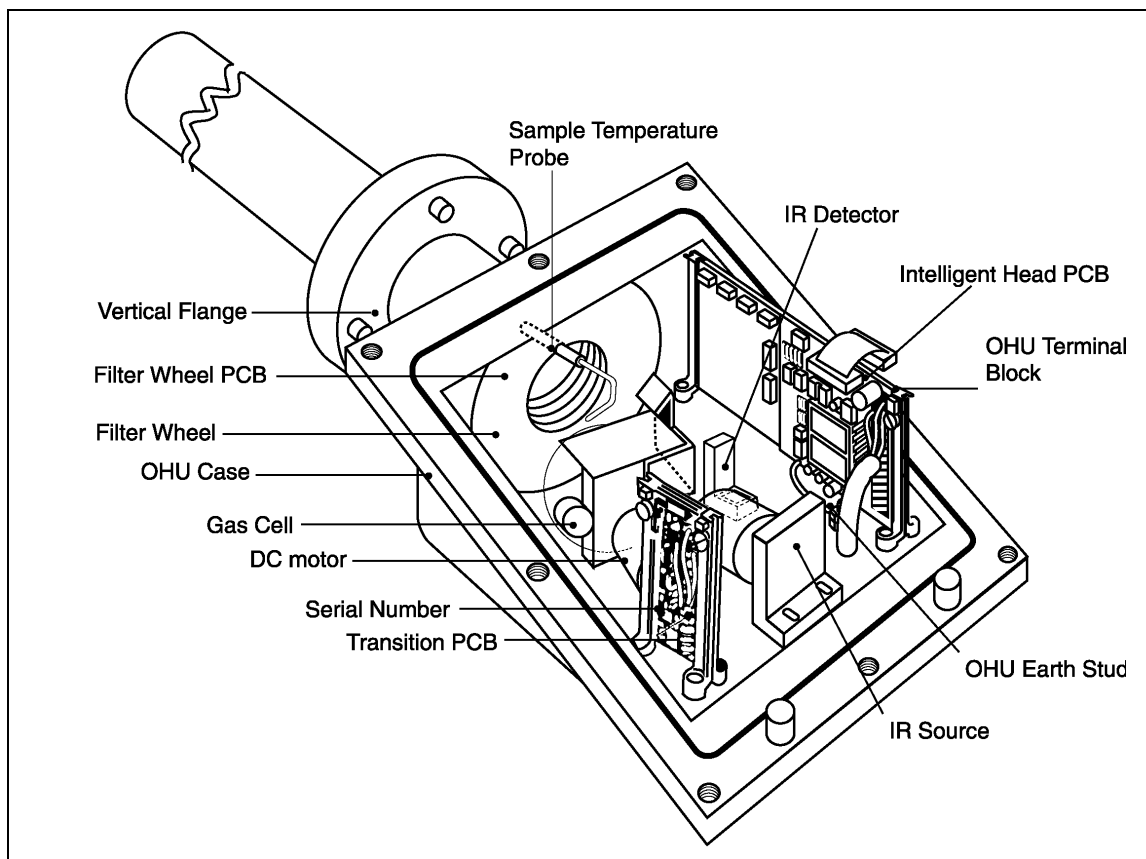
PULSI 200LR Optical Head Unit with cover removed
